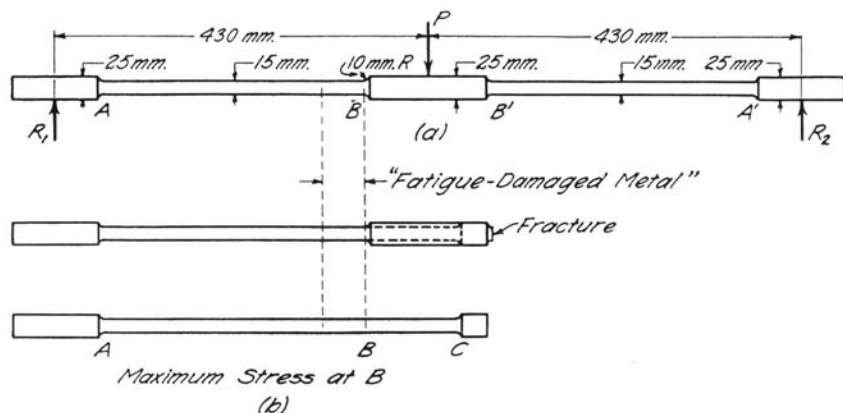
SPECIMENS USED IN BUDAPEST TESTS
